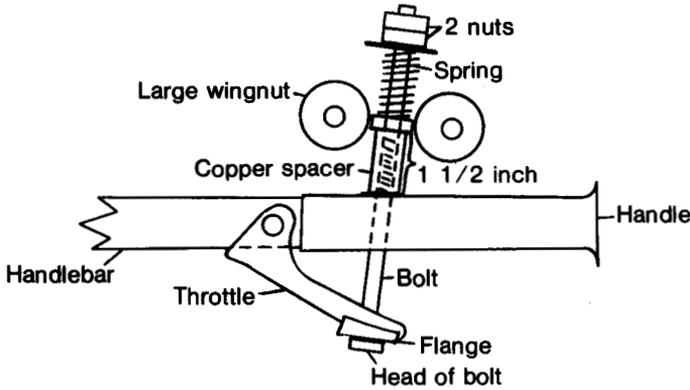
Snowmobile handlebar throttle showing modifications for remote driving. The copper spacer keeps the threaded part of the bolt out of the handlebar.
